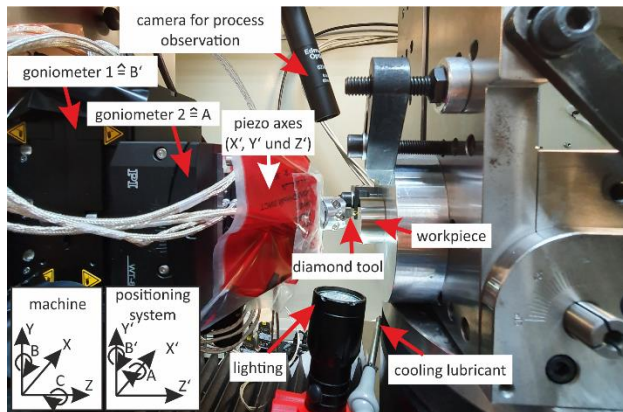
Tool positioning system on main spindle of the ultraprecision machine tool Nanotech 350FG.
